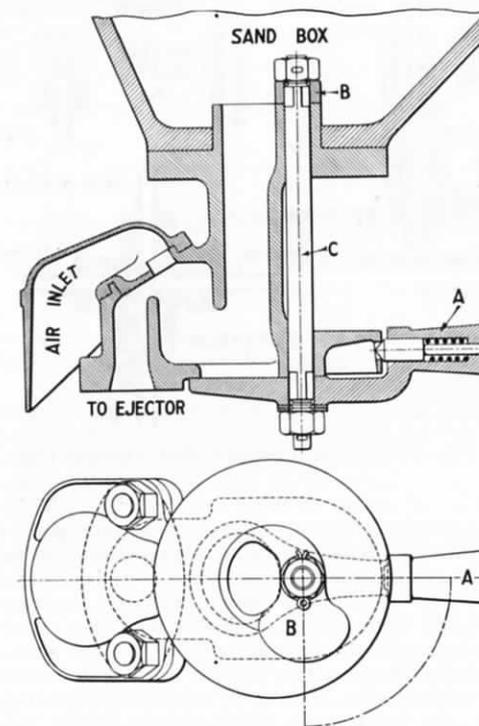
SECTION AND PLAN OF SANDBOX AND ATTACHMENTS.
